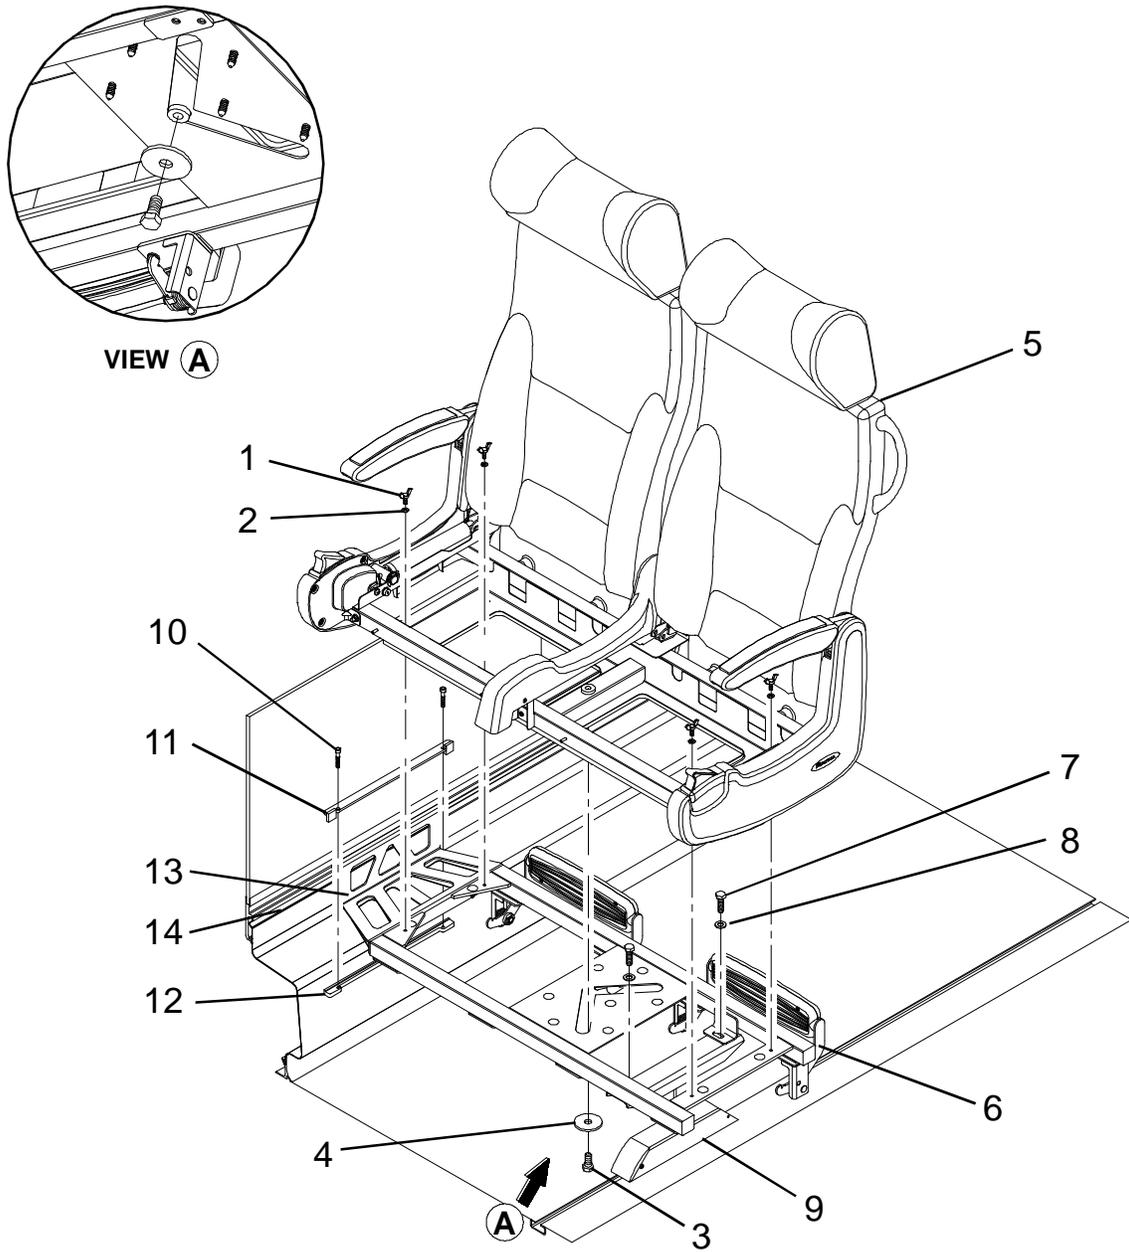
Two-Passenger Swivel Seat Removal / Installation
